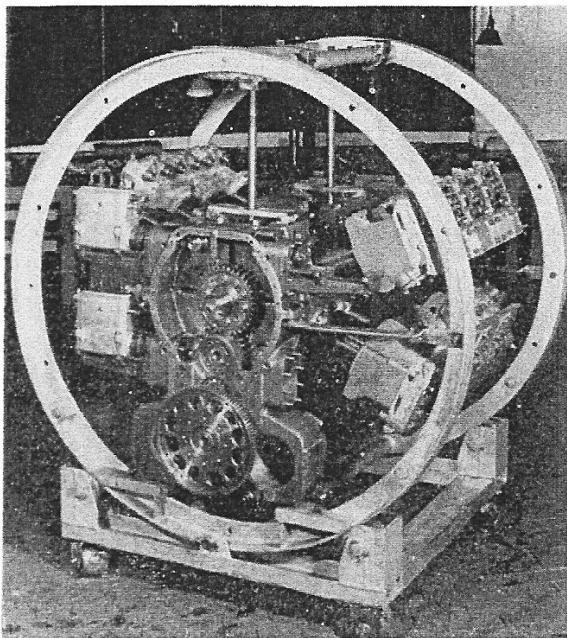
Simmering Graz Parker 750-hp, 16-cyl bare engine, Austria
